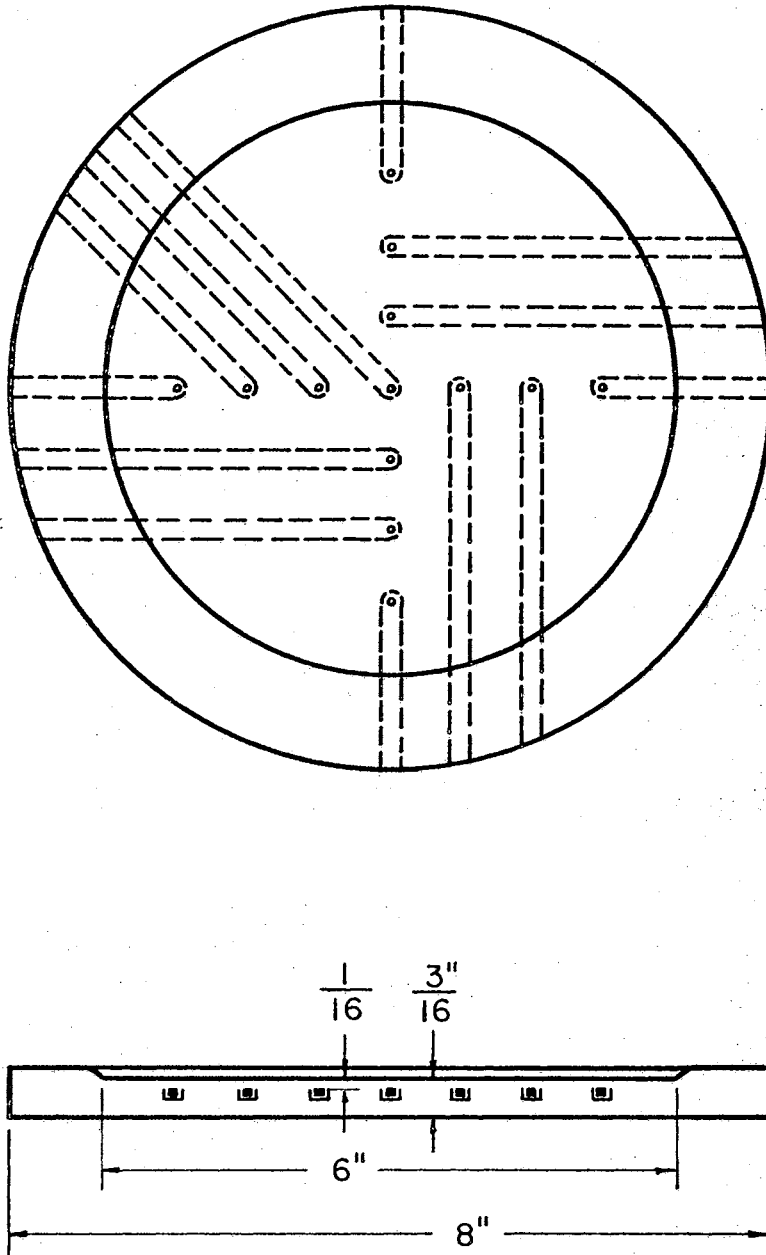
LARGE STAINLESS STEEL TEST PLATE.
